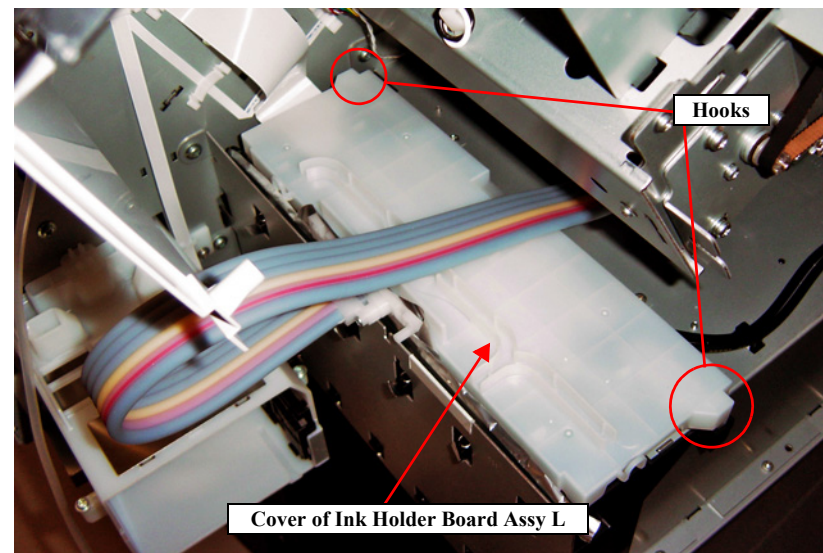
Removing the Cover of Ink Holder Board Assy L
